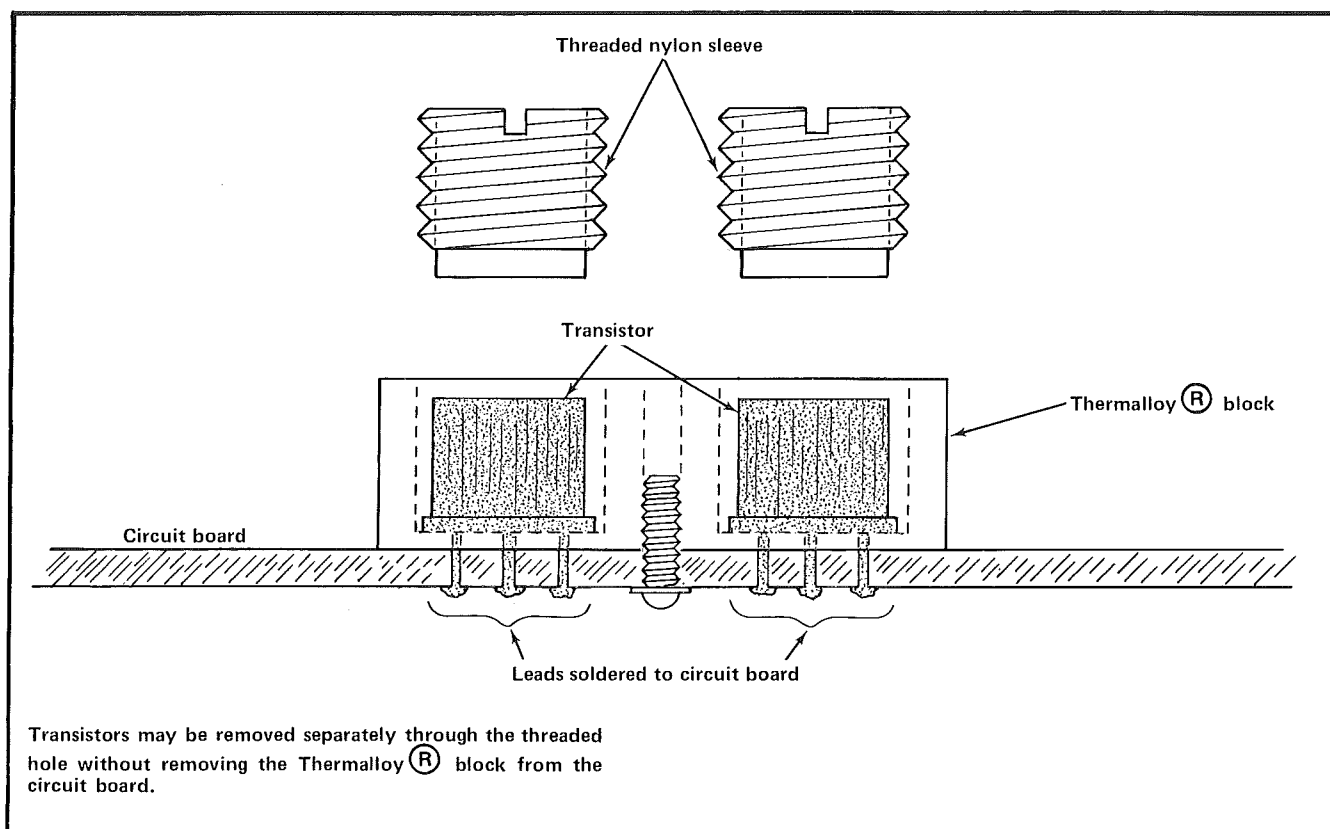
Q70-Q75 Heat-Sink Temperature Equalizer Assembly.
